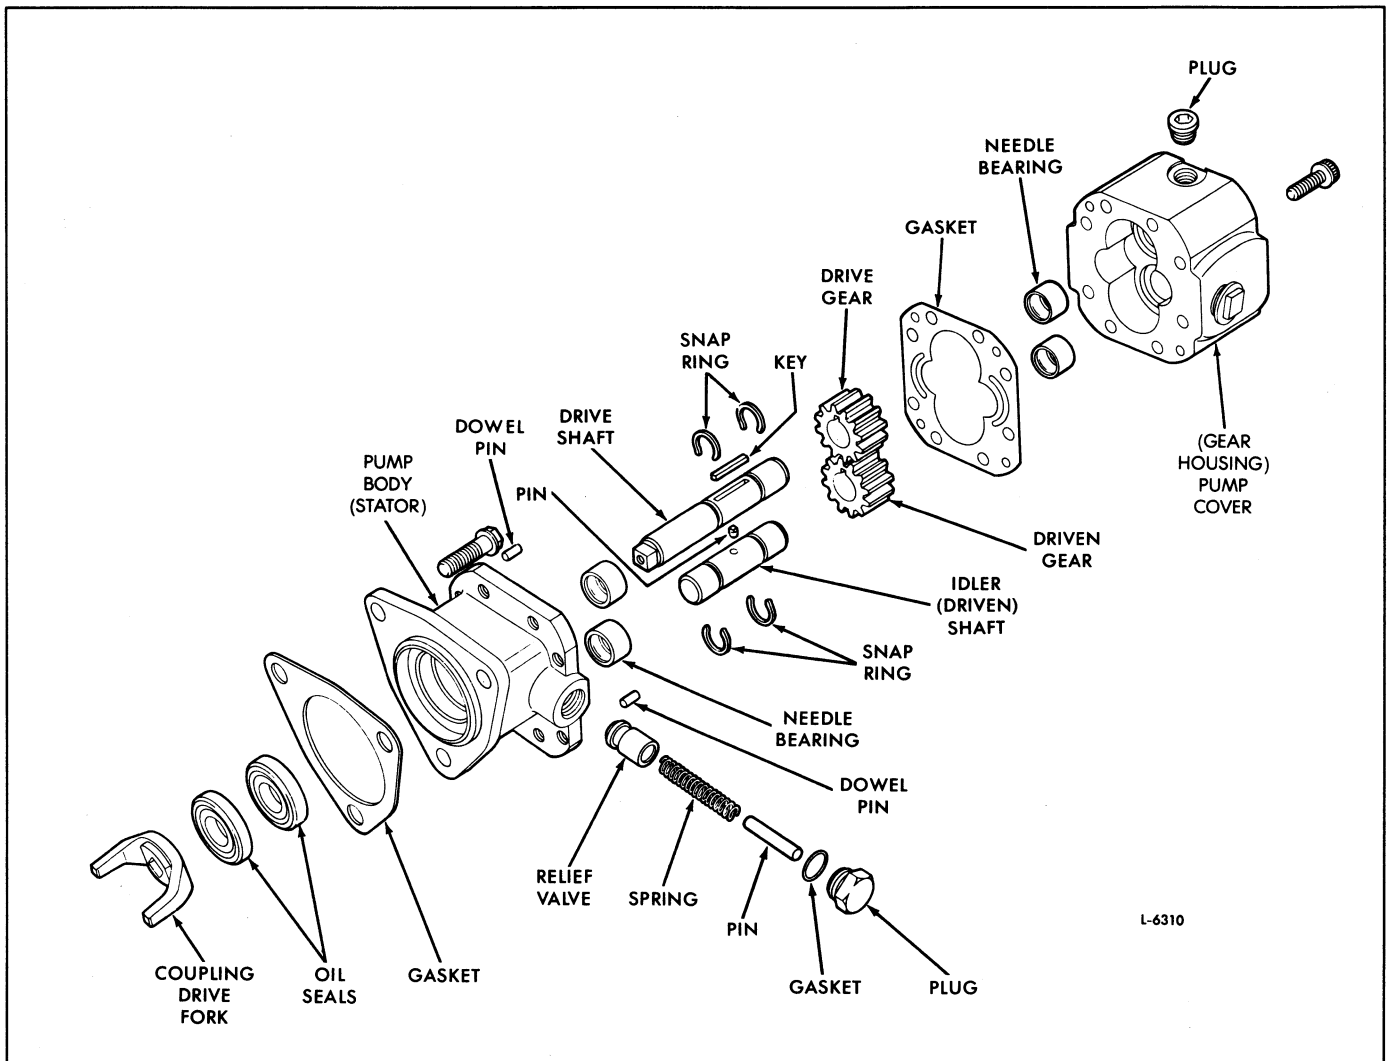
Current Fuel Pump Details and Relative Location of Parts
